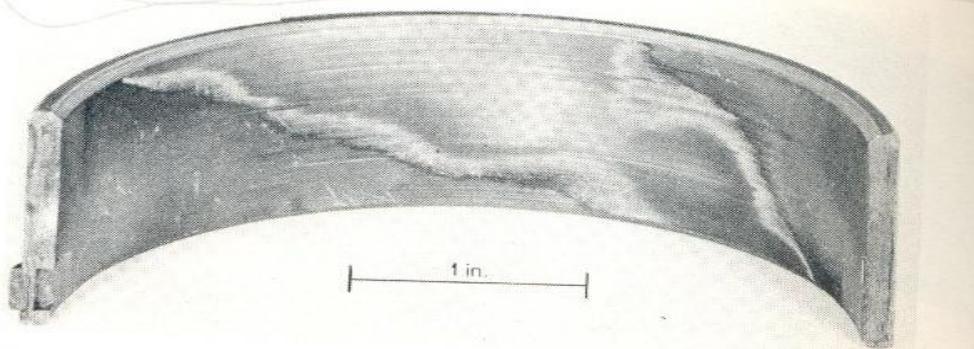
Skewed-wear pattern caused by a bent connecting rod.
